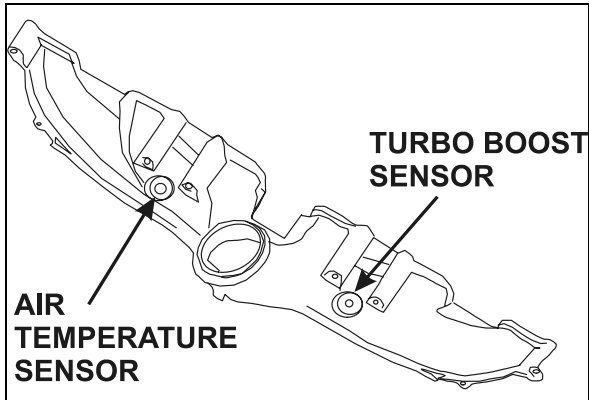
TURBO BOOST PRESSURE SENSOR 01023
